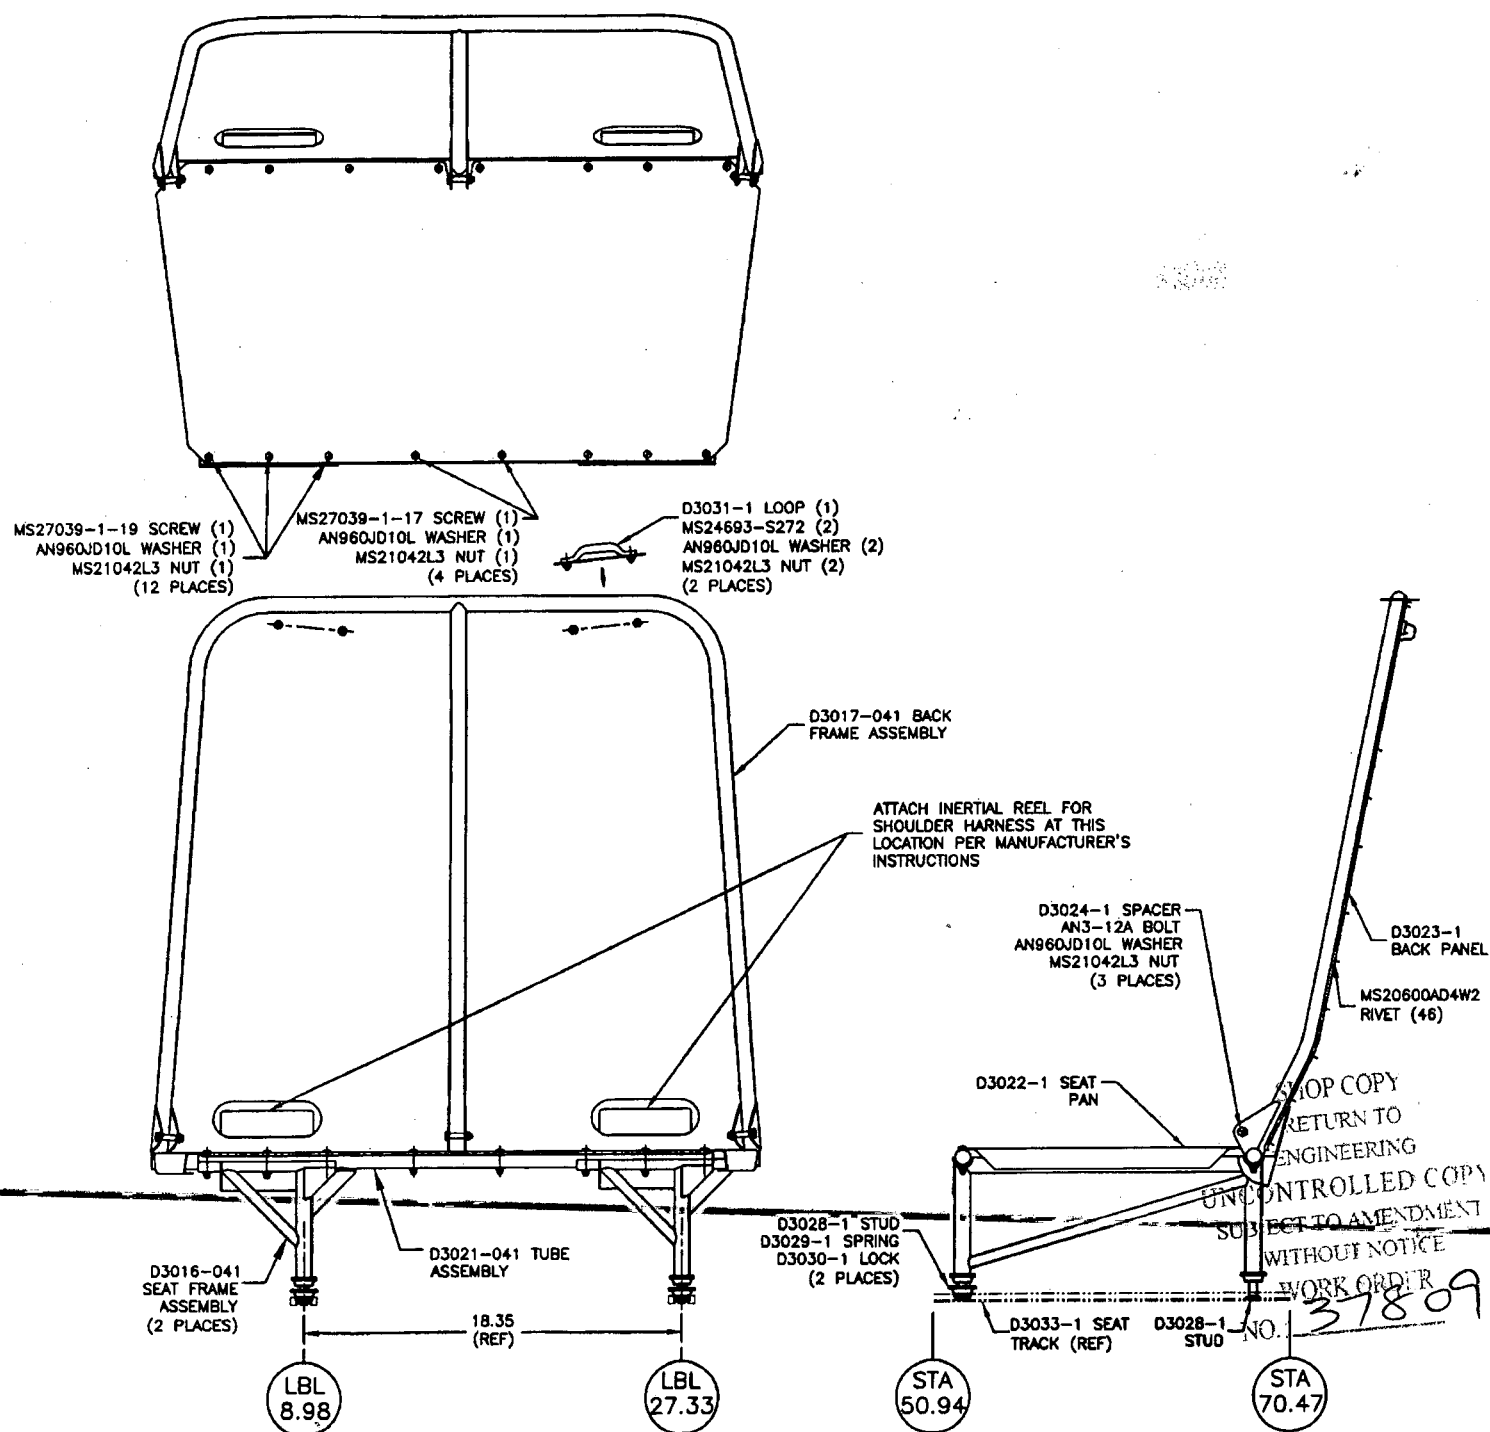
Installation of D350-689-041 Dual High Back Seat Assembly
